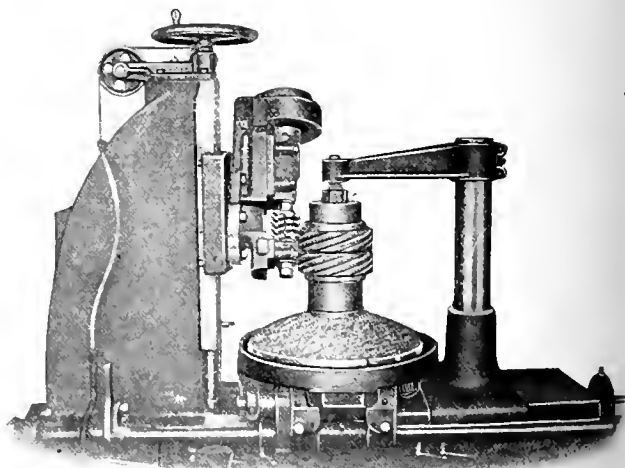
Gould & Eberhardt Machine cutting Spiral Gears.
